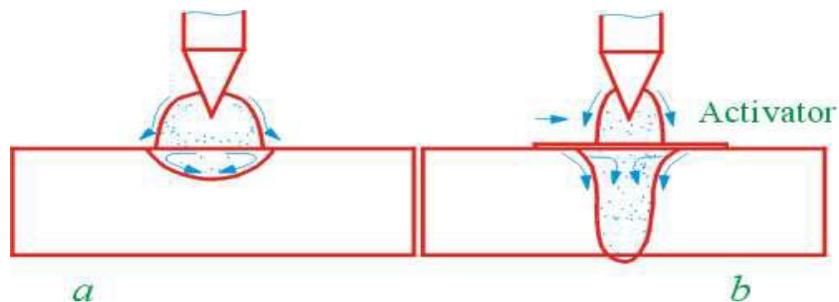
Schematic sketch of (a) TIG and (b) A-TIG welding processes
